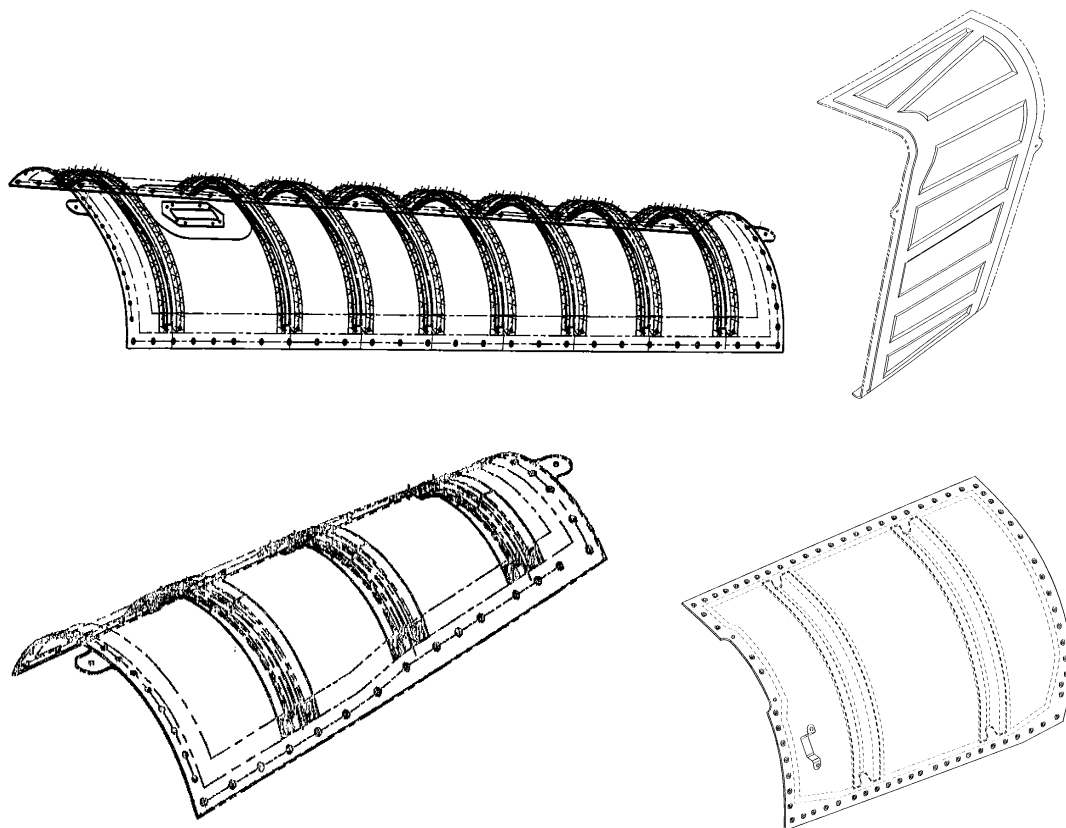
Examples of F/A-18 parts suitable for automated forming
